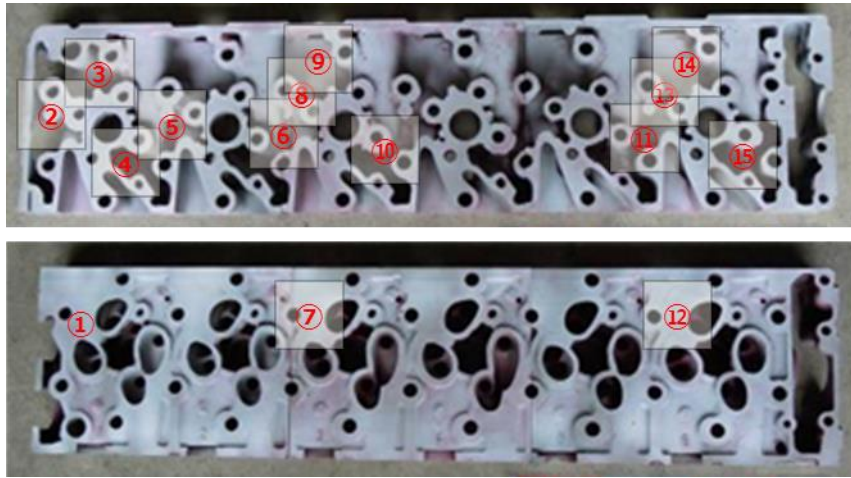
Location of three-point bending test specimens cut out from a cylinder head.
